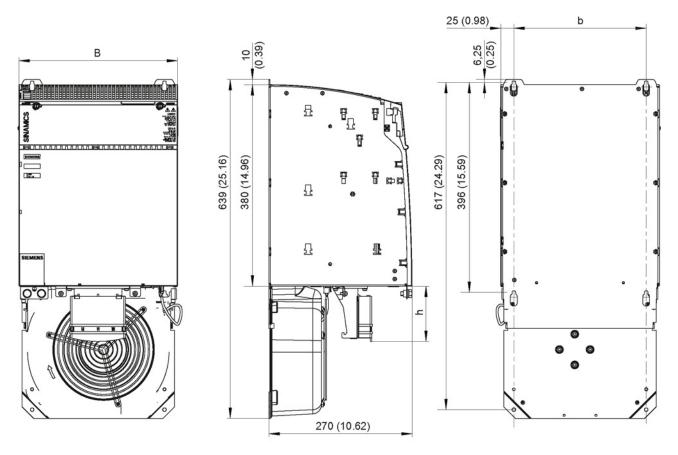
Dimension drawing of 80 kW and 120 kW Active Line Modules with internal air cooling, all dimensions in mm and (inches)
